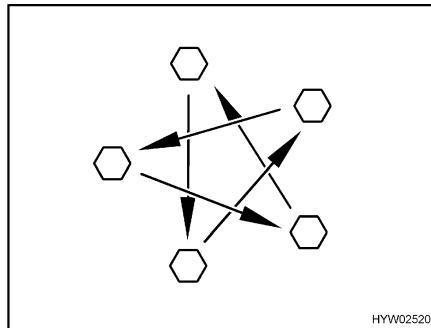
Tighten the wheel nuts or wheel bolts cross-wise
